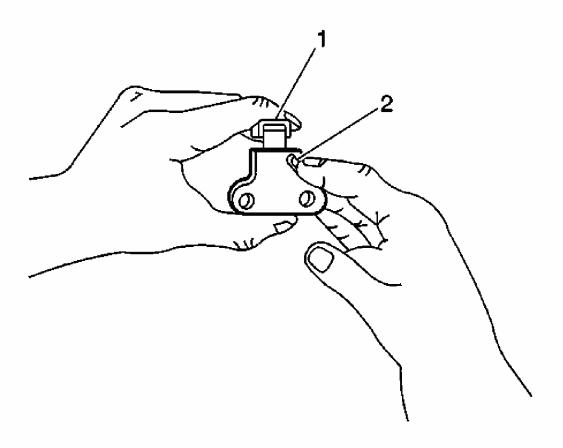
View Of Primary Camshaft Drive Chain Tensioner Shoe & Ratchet Lever
